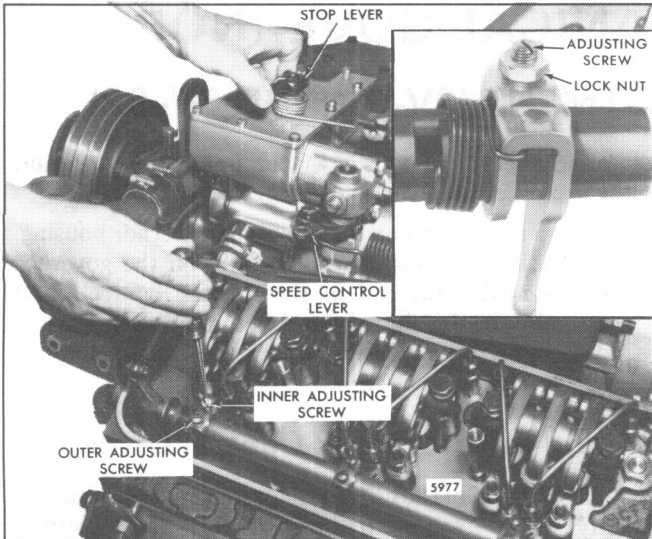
Positioning No. 1 Injector Rack Control Lever
